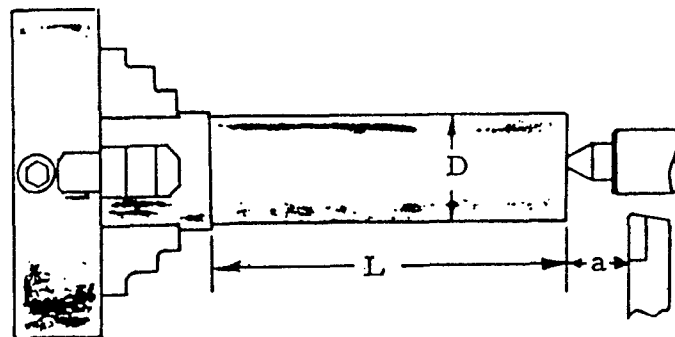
Lathe Tools and Setup for Turning Equations.
